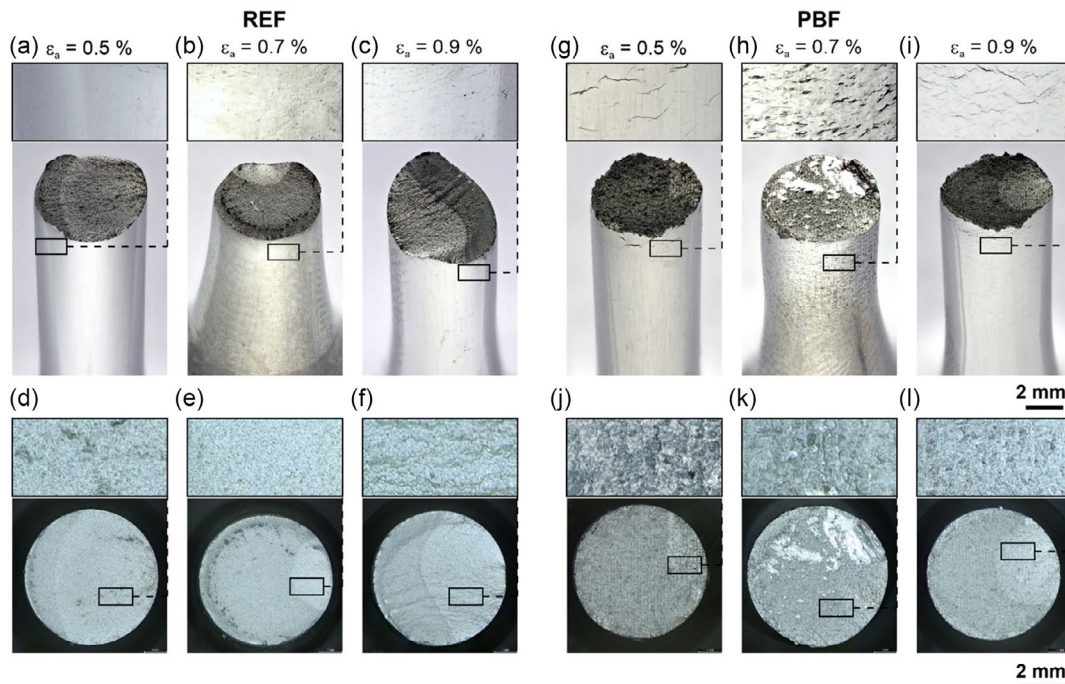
Fracture surfaces of the LCF specimens tested at RT (left REF, right PBF-LB/M). The top row shows photographs of the fractured specimens, the bottom row OM images (top view) of the fracture surfaces (note: in the bottom row, the supposed crack initiation is always on the right and might be rotated to the top row). The small rectangular images on top represent enlarged details.
